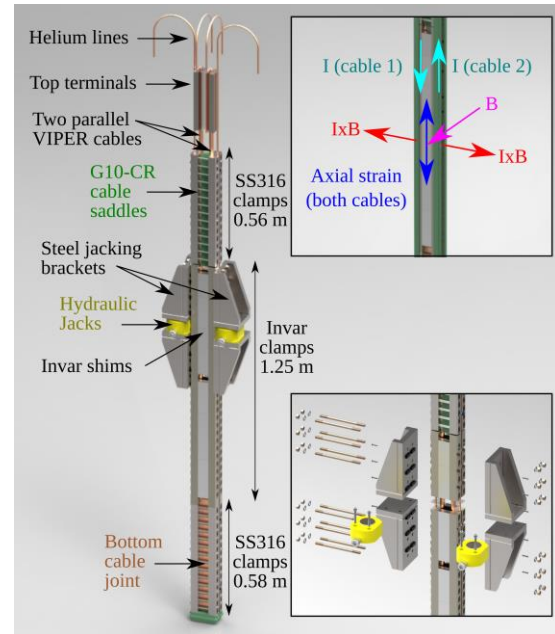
The cable assembly enclosing two VIPER cables for testing at SULTAN. The top-right inset describes the $I \times B$ and strain directions on the cables; the bottom-right inset shows how the strained assembly with hydraulic jacks is assembled.
